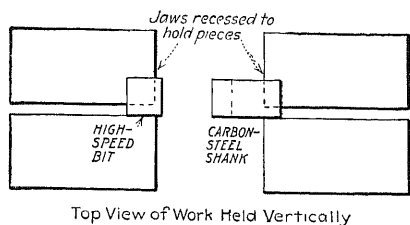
Jaws Used for Stellite Insert Welding.
